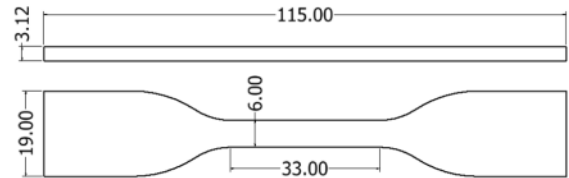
Shape and dimensions of tensile specimen (unit: mm)
